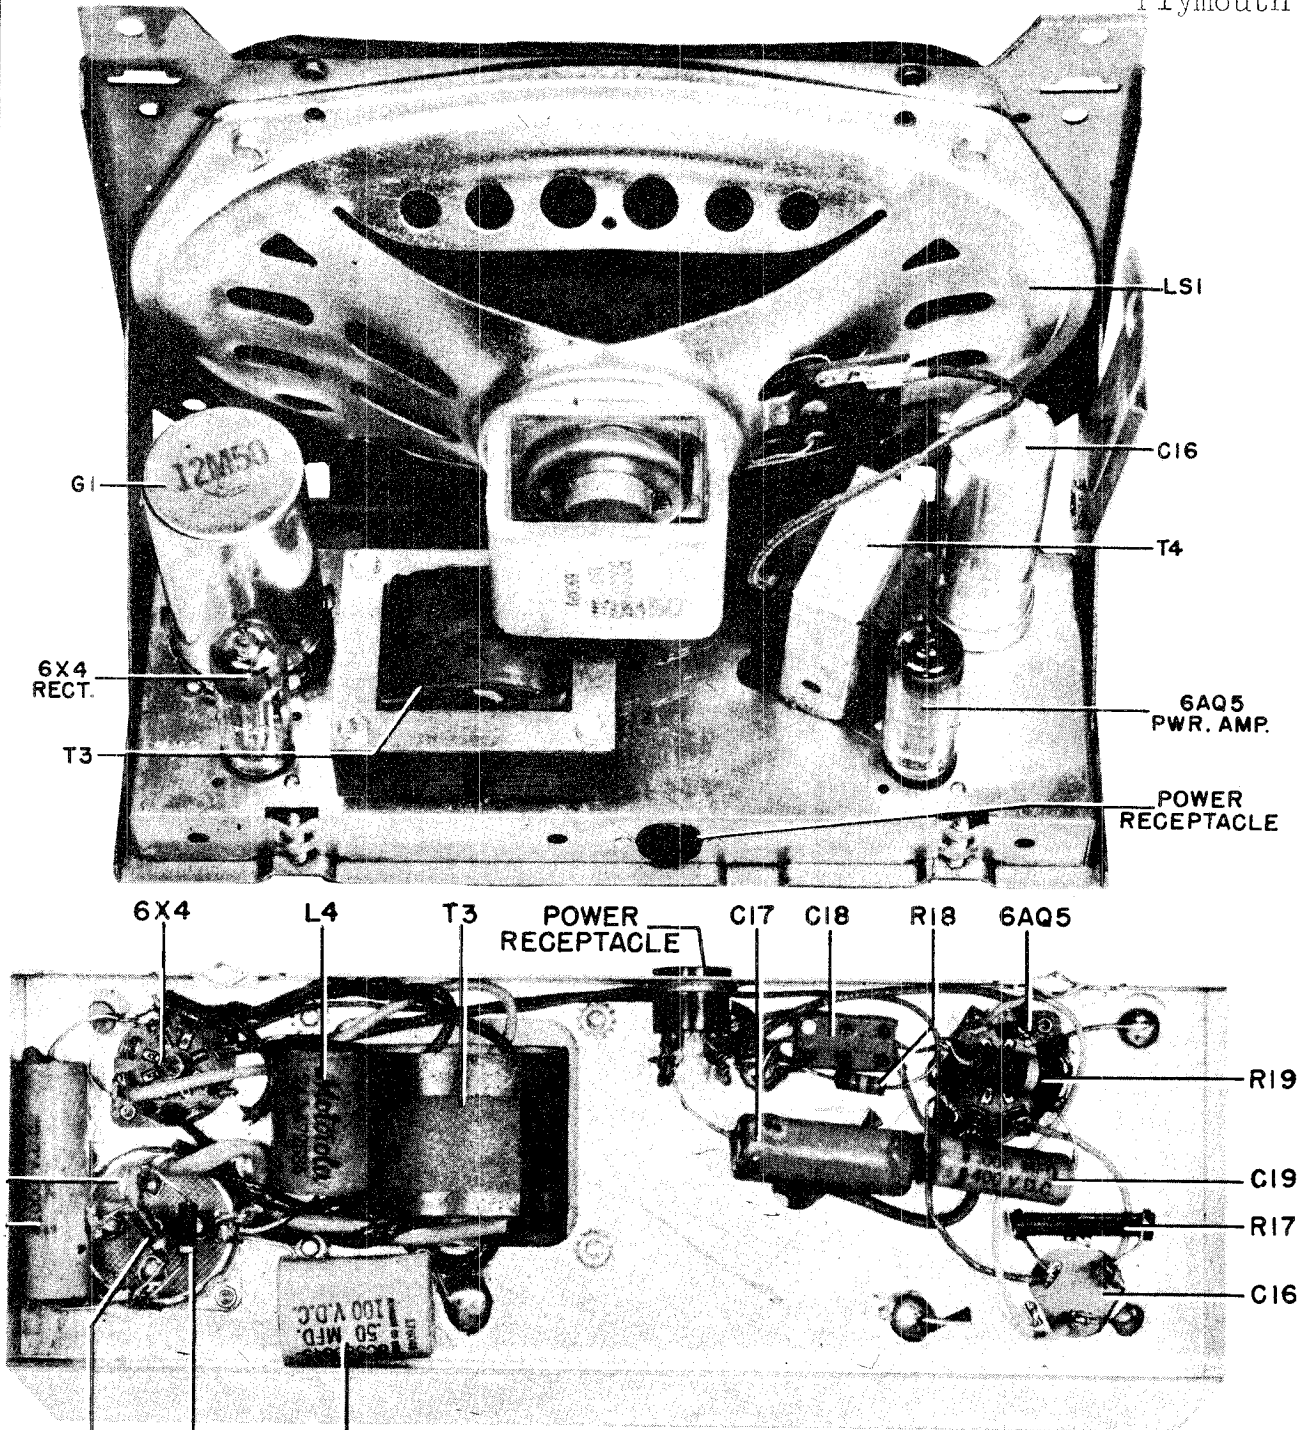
PARTS LOCATION - SPEAKER & POWER UNIT
